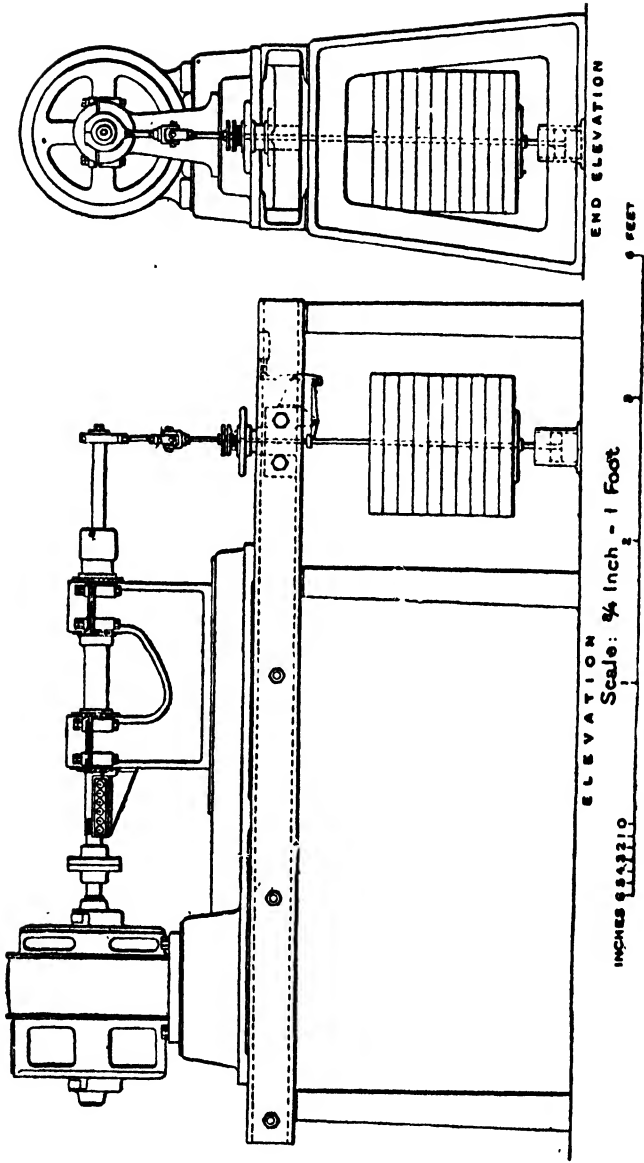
THE N.P.L. WOHLER FATIGUE TESTING MACHINE
